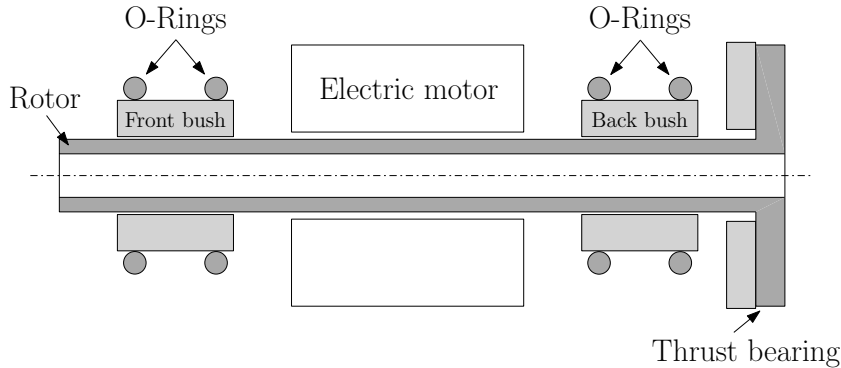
Conceptual sketch of LAMD prototype with O-Ring supported HGJB bushings
